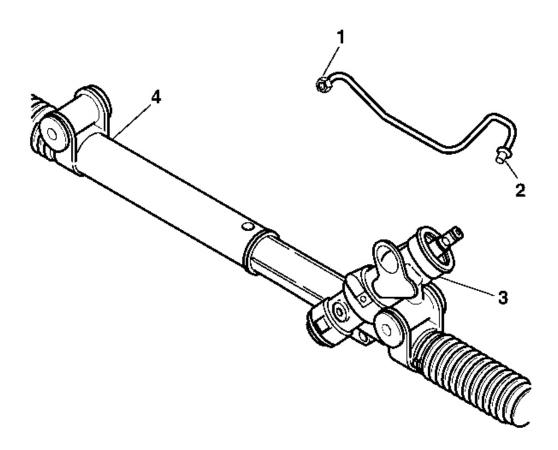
Identifying Steering Gear Cylinder Pipe At Valve End Of Steering Gear Courtesy of GENERAL MOTORS CORP.
